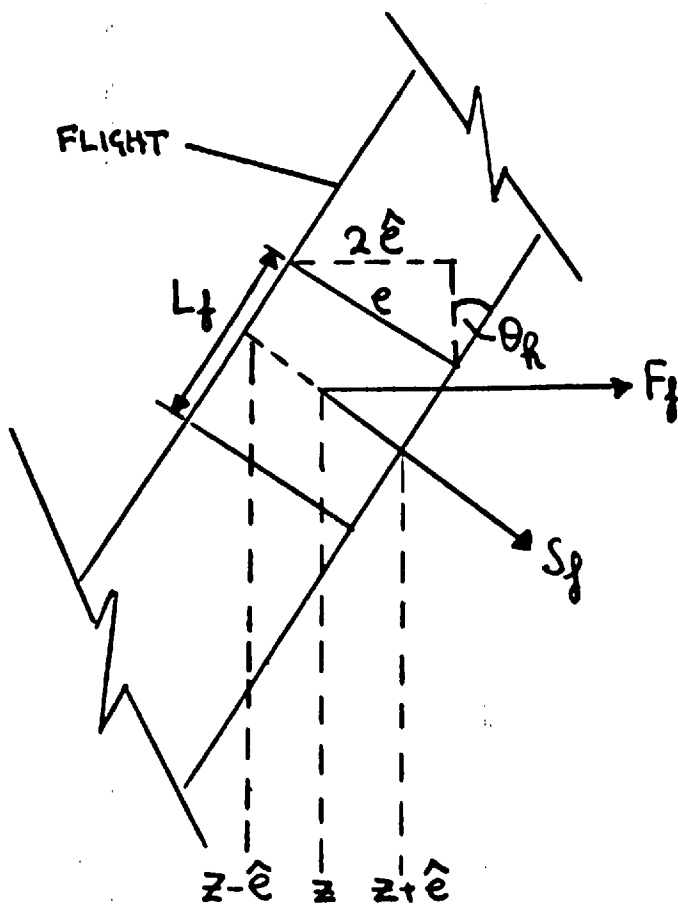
SECTION OF FLIGHT CUT PERPENDICULAR TO THE SCREW AXIS
